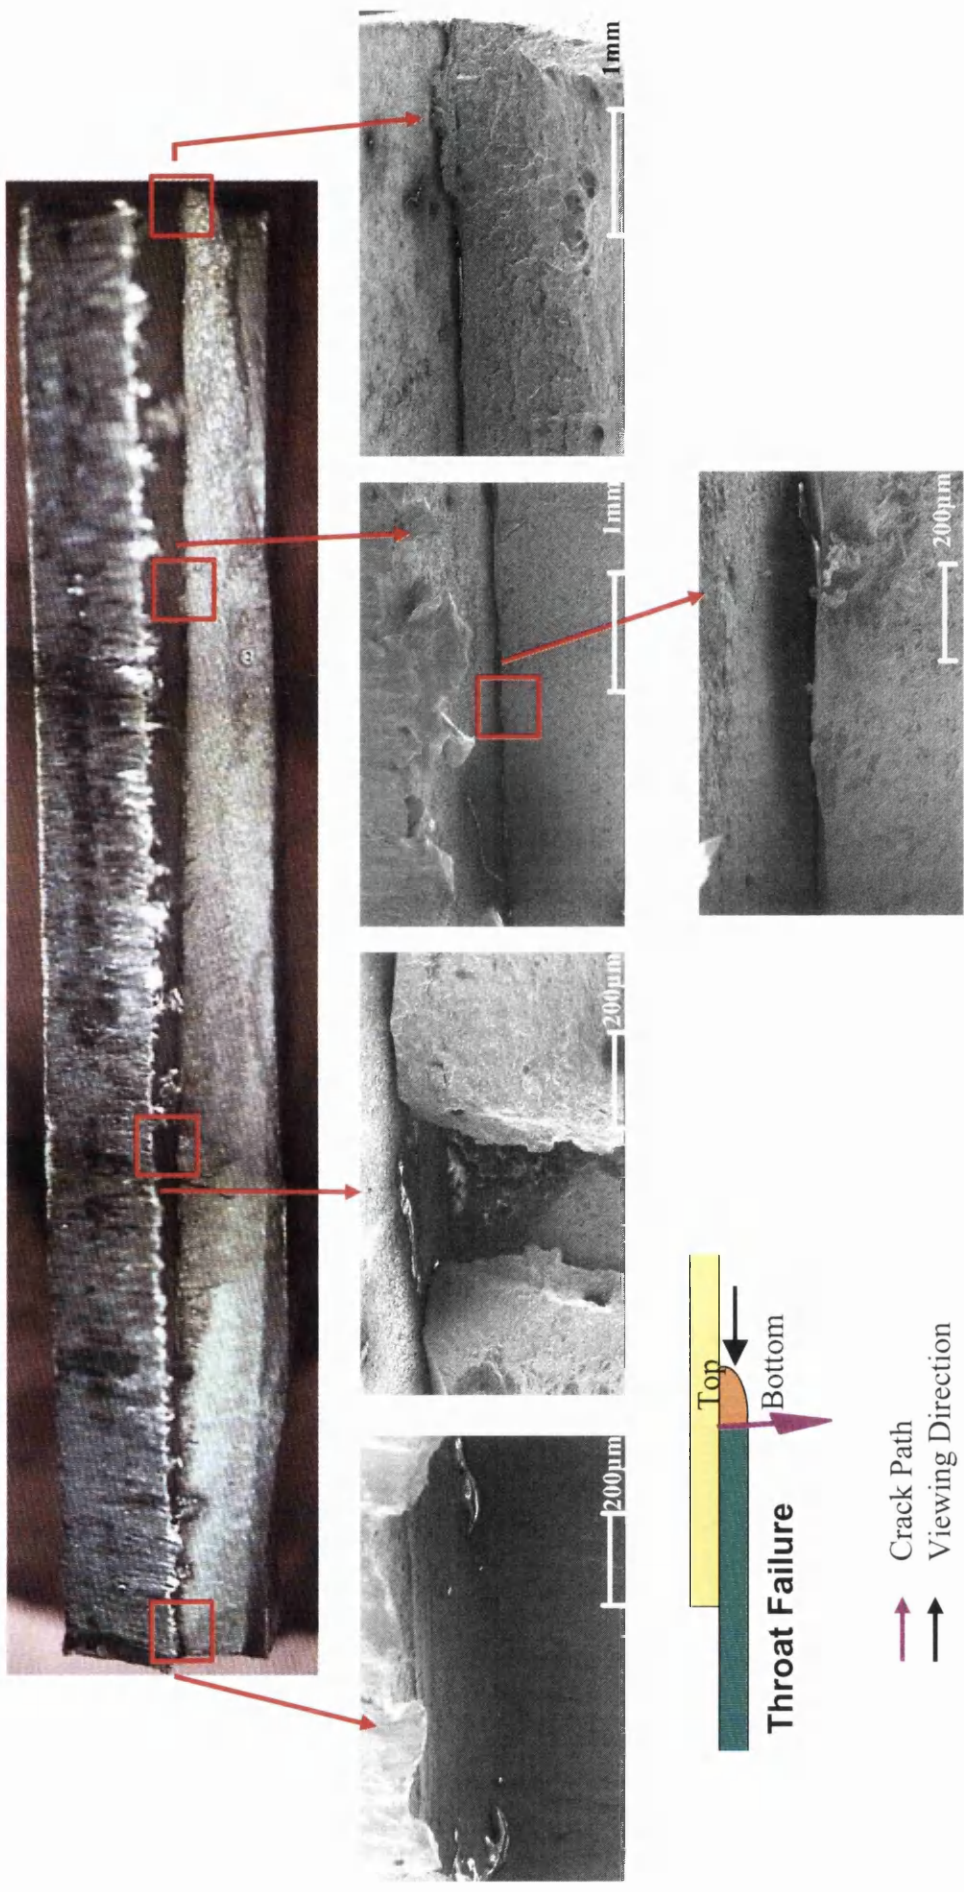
Typical Fracture Surface for GM2 Weld Throat Failure – Weld View
